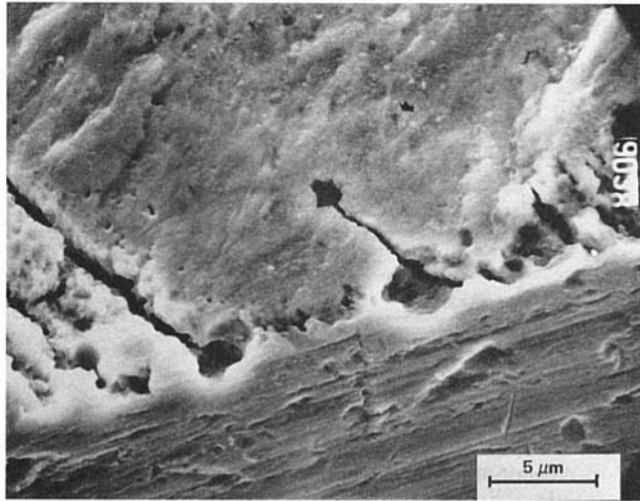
Example of corrosion pits and slots: the lower part of the fractograph shows the inner perimeter and part of the surface of the central hole in the pin
